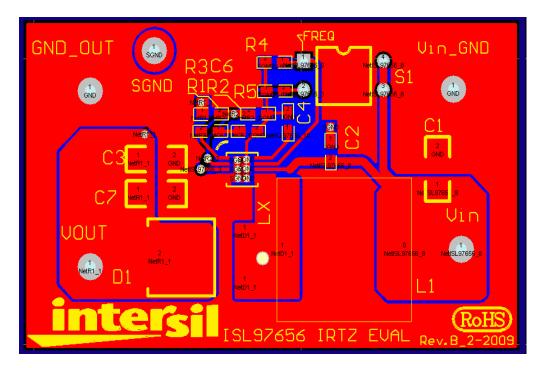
EVALUATION BOARD ASSEMBLY LAYER
